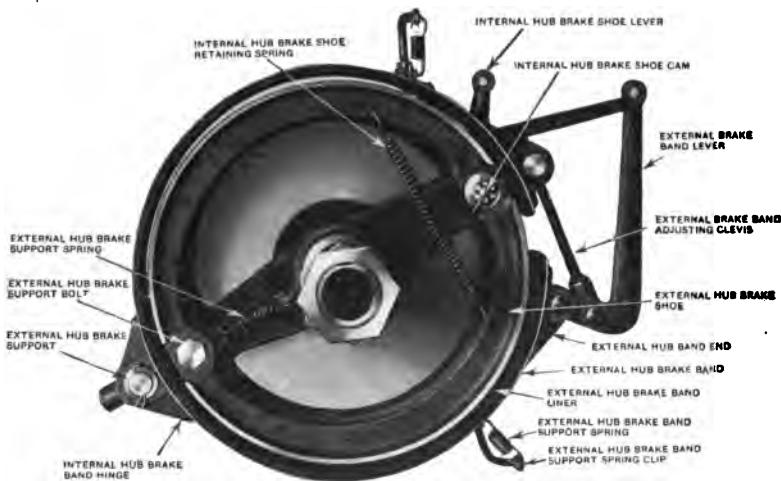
Internal and External Brake System of Peerless Car, Showing Details Connected with Operation.
